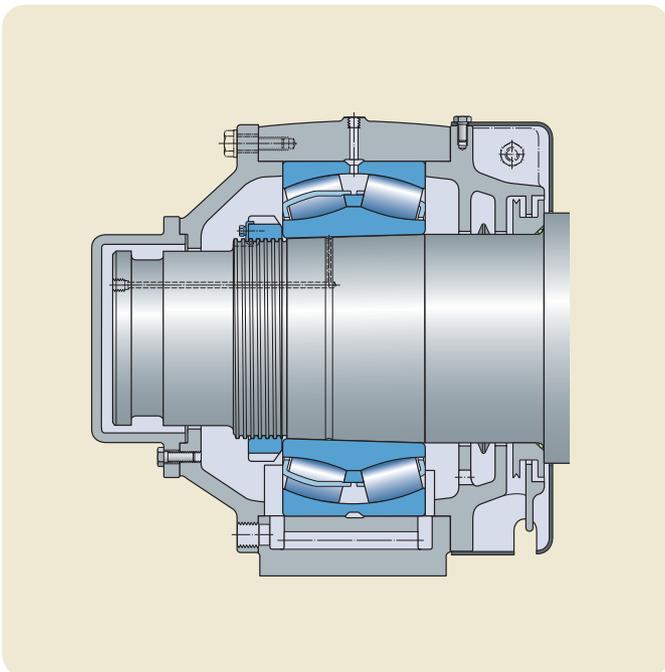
Example of a plain press roll bearing arrangement from the SKF Rolling bearings in paper machines handbook.
